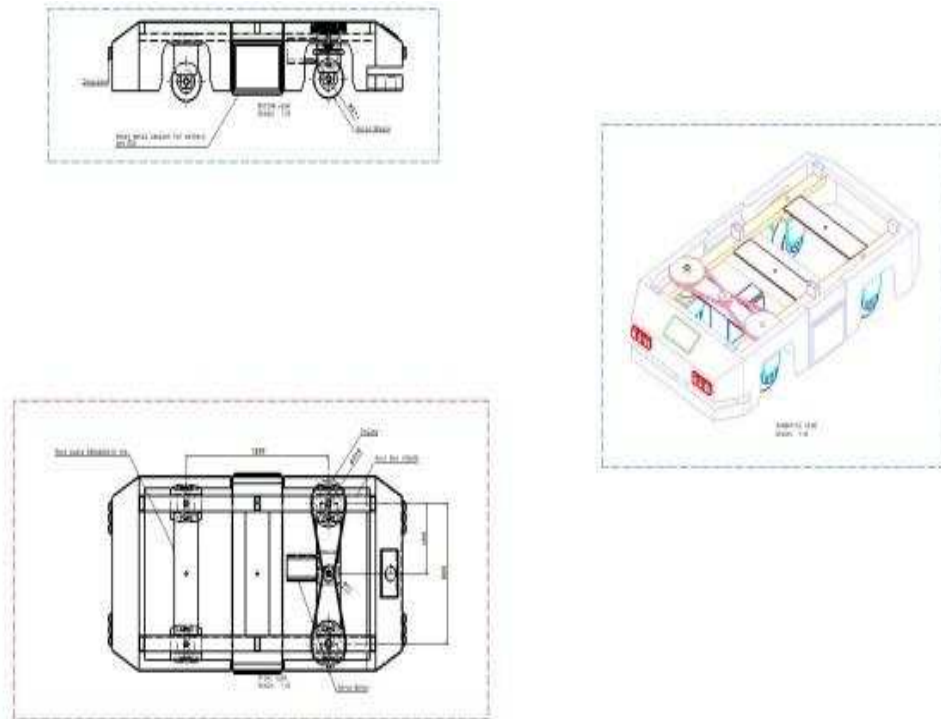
(a) Side view, (b) Top view, (c) Isometric view
